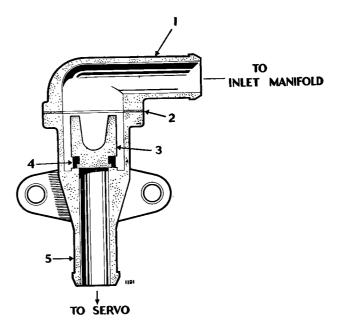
Sectioned view of the 2.4 litre vacuum check valve.
